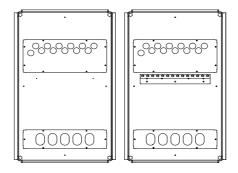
Top view of cabinet with upper wire-outlet holes (the right figure containing of cable clamp)
